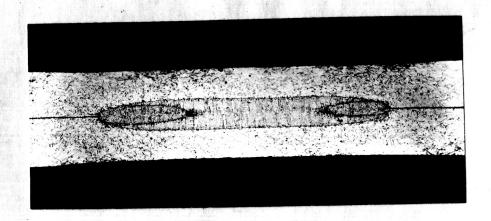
Cross-sectional view thru the centerline of spot weld No. 6 (see Fig. 1). The load was applied to the top sheet and directed to the right. Radiographic inspection detected a crack.
